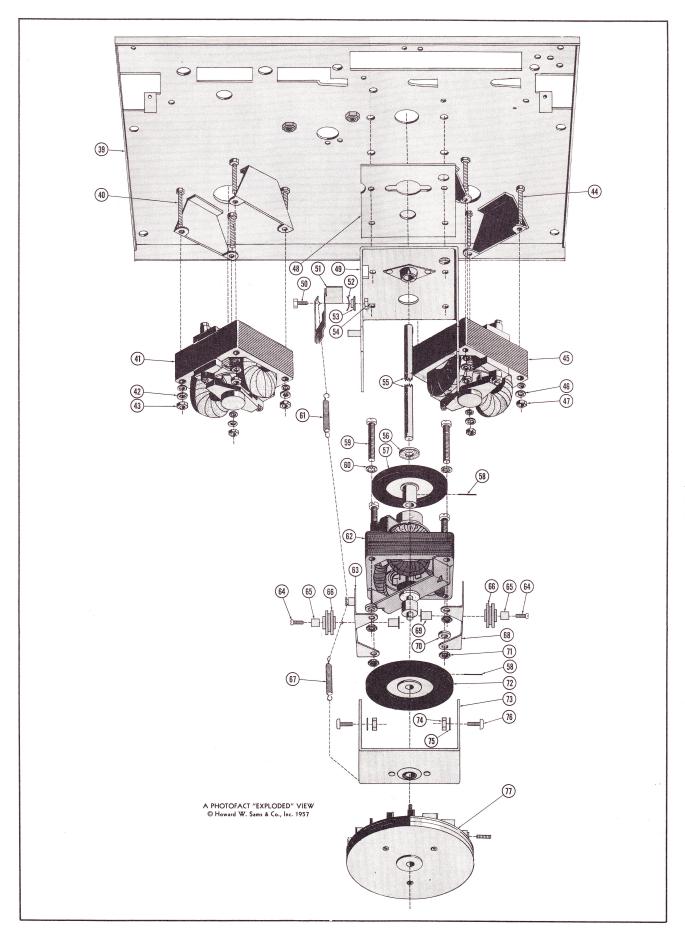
B. EXPLODED VIEW OF PARTS BELOW BASEPLATE.
